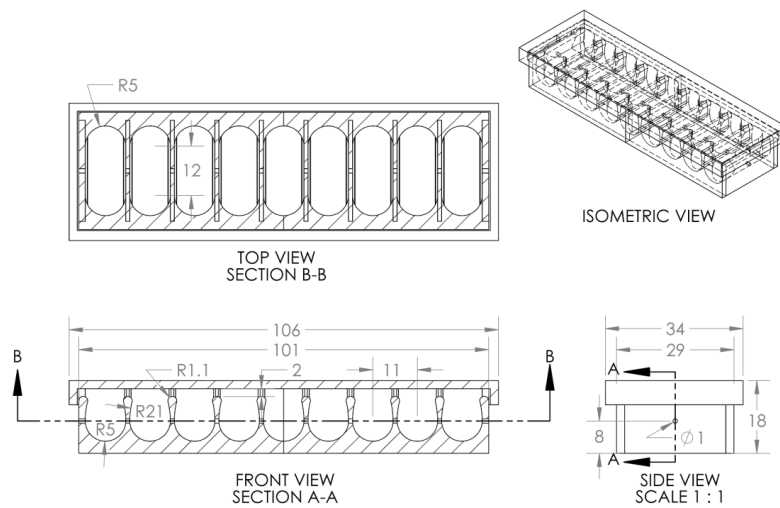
Orthogonal views of mold assembly for cuboid actuator
